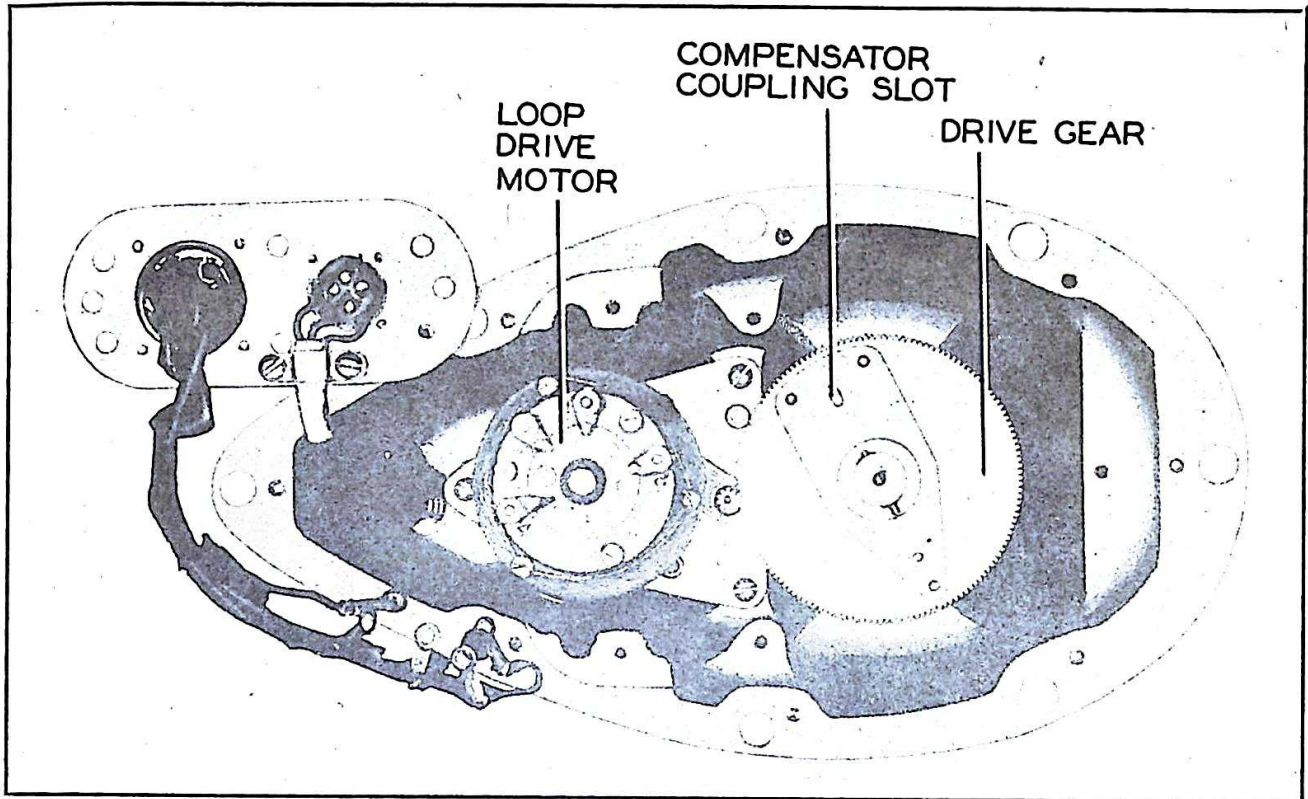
Loop LP-21-A—Compensator MC-217 Removed
